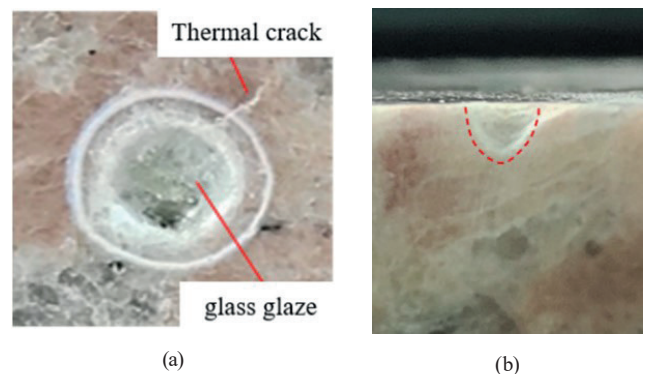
Morphology of holes obtained by the laser drilling tests: (a) thermal crack and glass glaze; (b) cross-sectional topography
